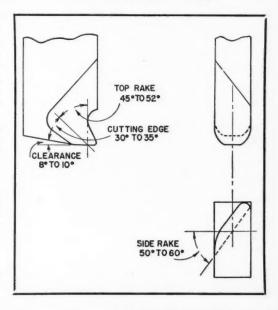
Drawing Showing Suggested Grinding Angles for Planer or Shaper Roughing Tools
